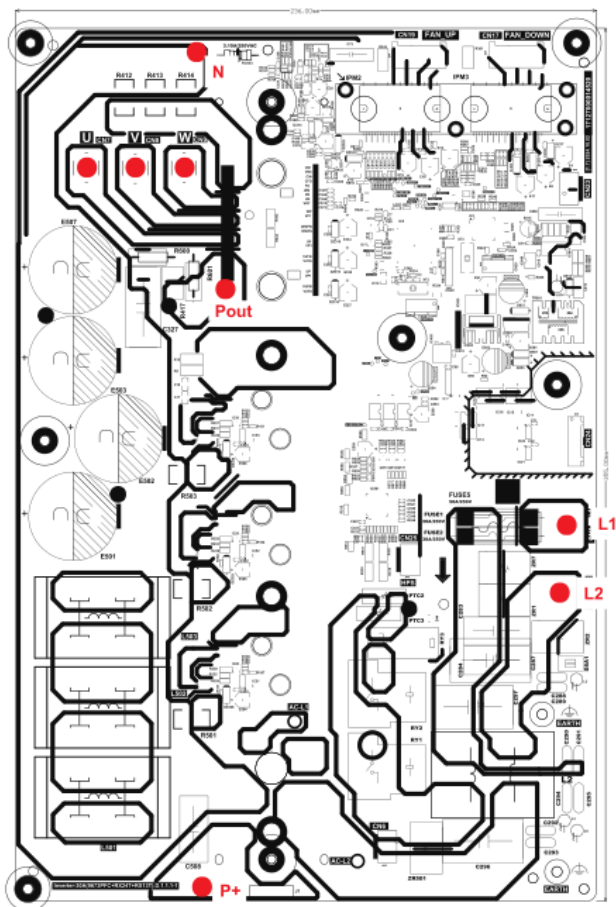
Compressor & Fan Drive Board measurement guidelines
